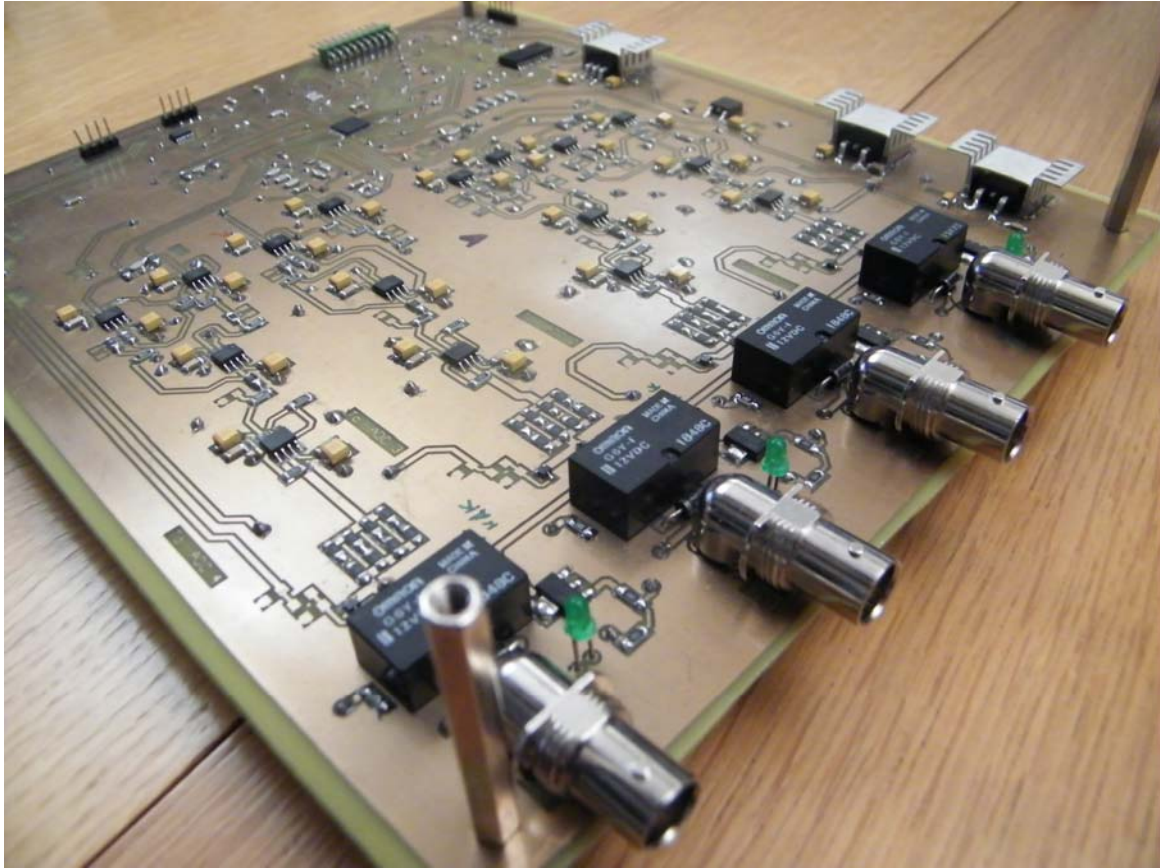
The fabricated PCB board of the multiple output waveform generator (Version 2)
